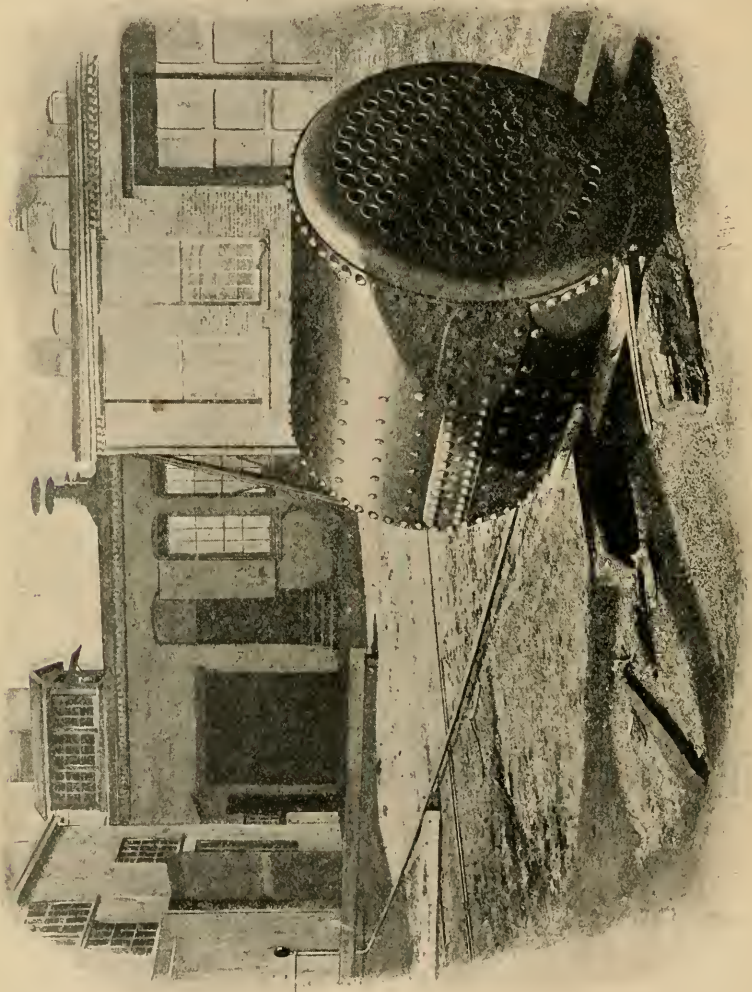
SHOWING THE BOILER, SUPPLY PIPE, AND PRESSURE GAUGE.
